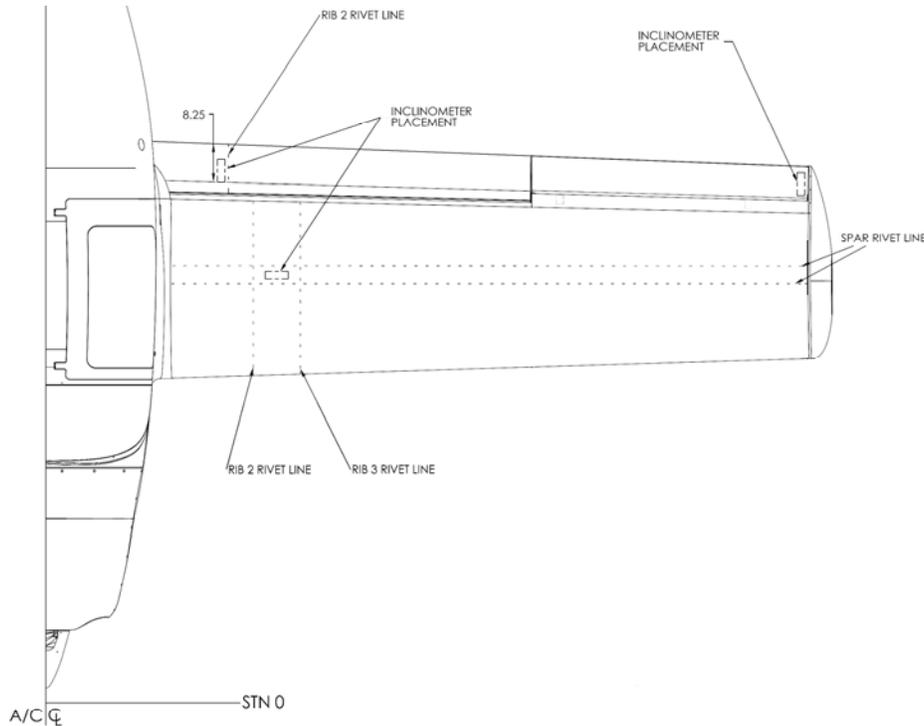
Location Aileron Inclinator true Port & Starboard
